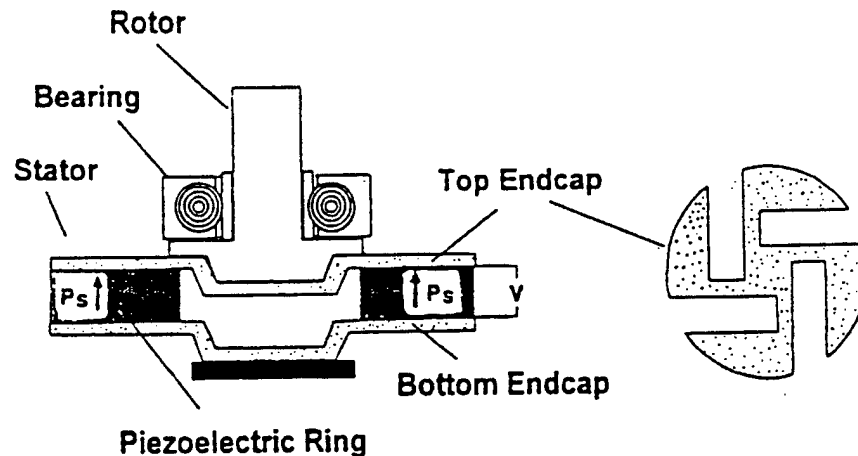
"Windmill" motor with a disk-shaped torsional coupler.
